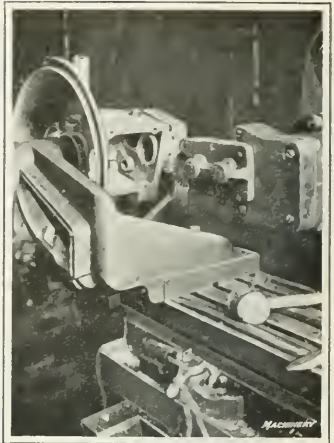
Extension Milling Attachment, with Work in Place in Fixture
